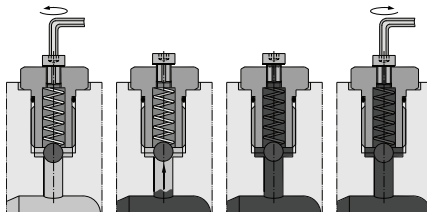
Filling and bleeding hydraulic cylinders with check valve
